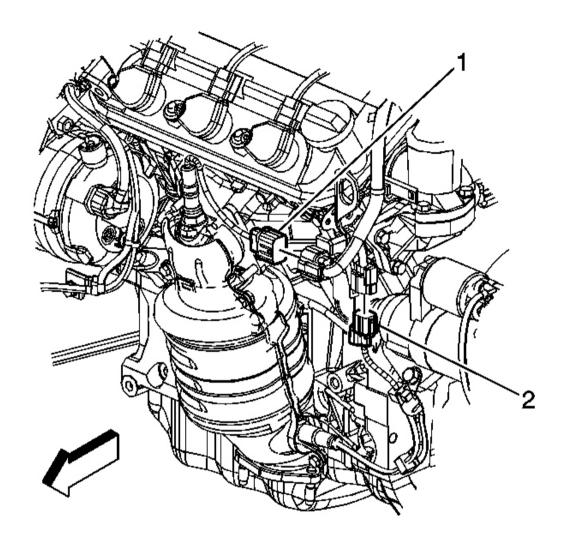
View of Heated Oxygen Sensor (HO2S) Bank 2 Sensor 1 Courtesy of GENERAL MOTORS CORP.
